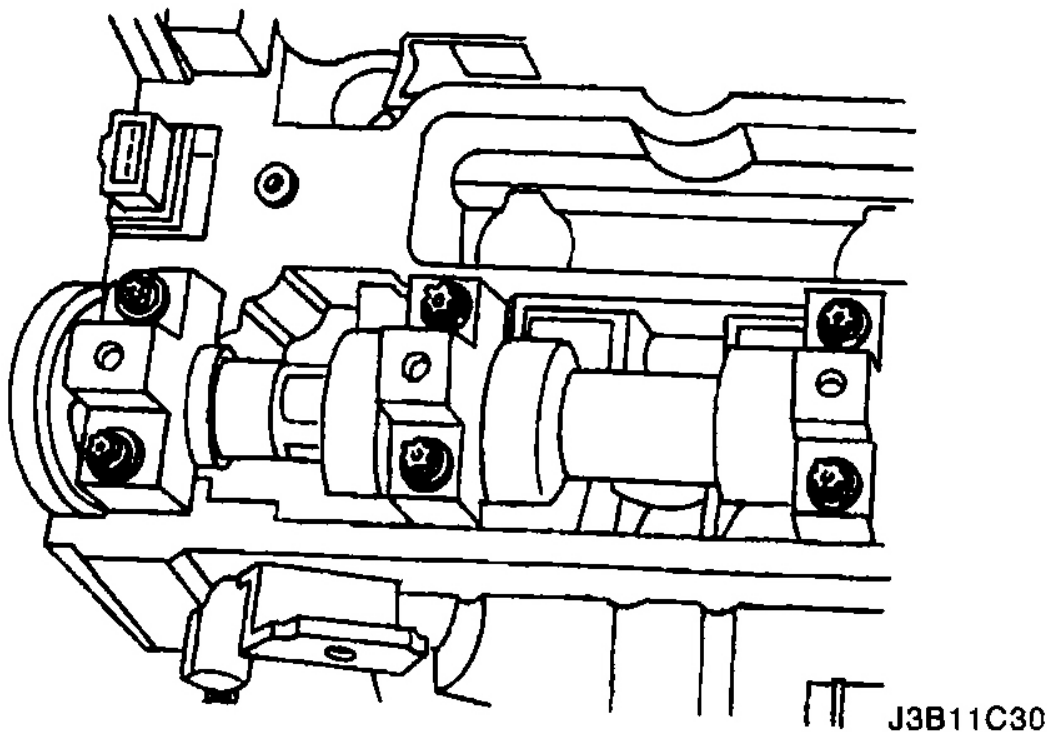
Checking Camshaft And Bearing Seats For Wear
